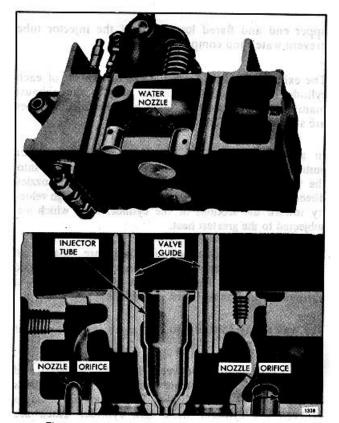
Water Nozzle in Two-Valve Cylinder Head
